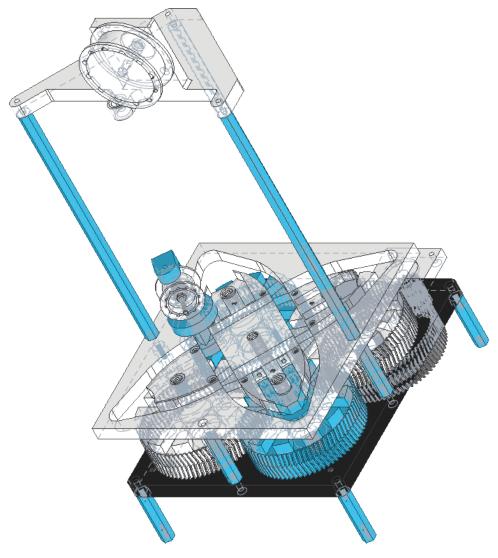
Non-twisting cable braider. Shown with one spool assembly, one spring tip on the lower right, and one tip cover on the lower left. Shafts, springs, motors, and most fasteners not shown.
